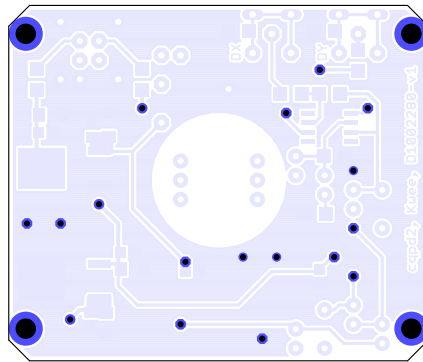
Board bottom view showing connectors, test points, vias and wired components
